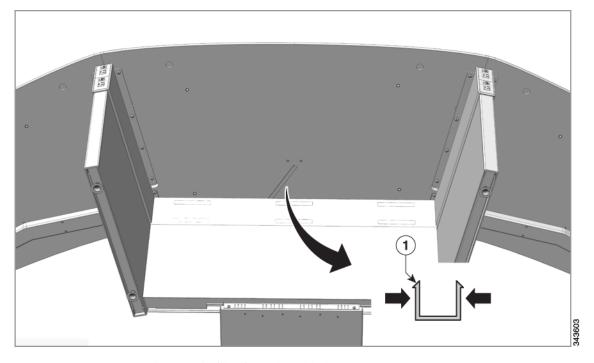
Attaching the Center Upper and Lower Privacy Panels (Inner)
